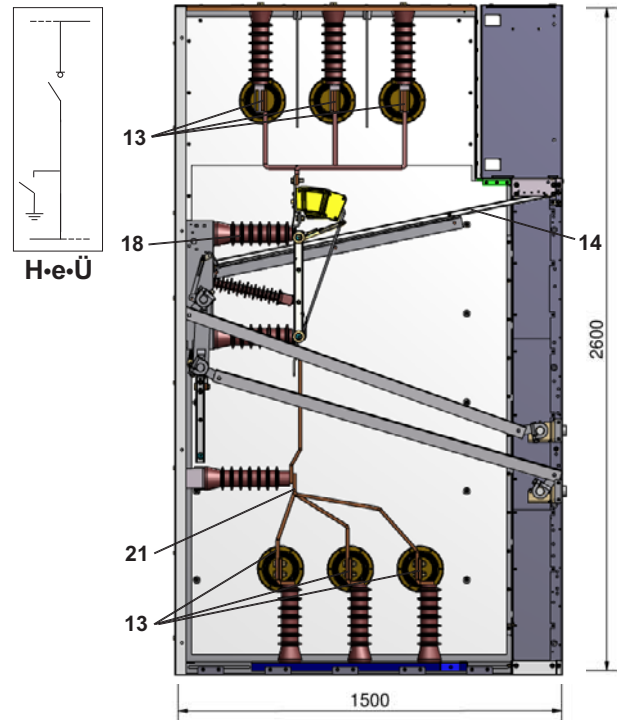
PRO-AIR H•e•Ü, Type bus sectionalizer panel, 630 A busbar
